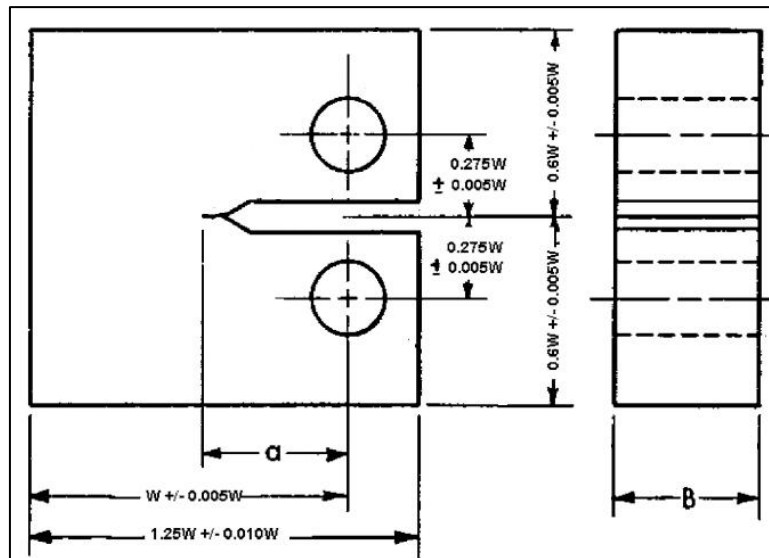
Compact tensile specimen $C(T)$ for fracture toughness test [93].
